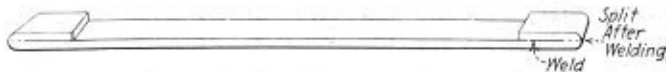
Ends for Brace Feet Are Bent and Welded Back on Body of the Brace
